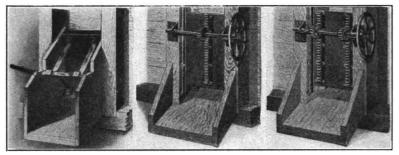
Belt-and-bucket elevator take-up boxes.11
